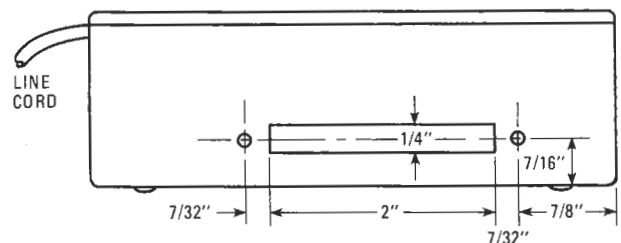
DIMENSIONS ARE PROVIDED here for openings in the connector. See text for additional explanation.
